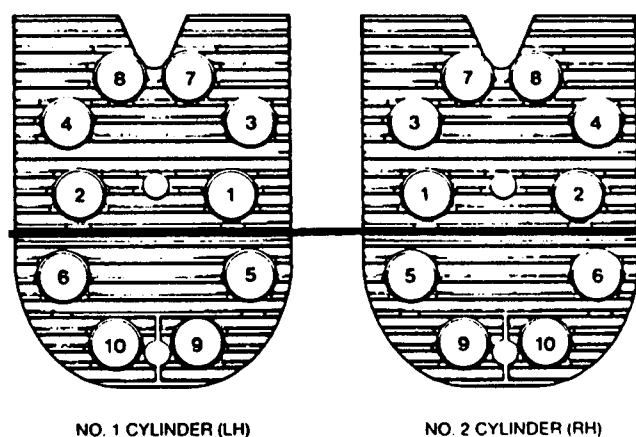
CYLINDER HEAD TORQUE SEQUENCE
